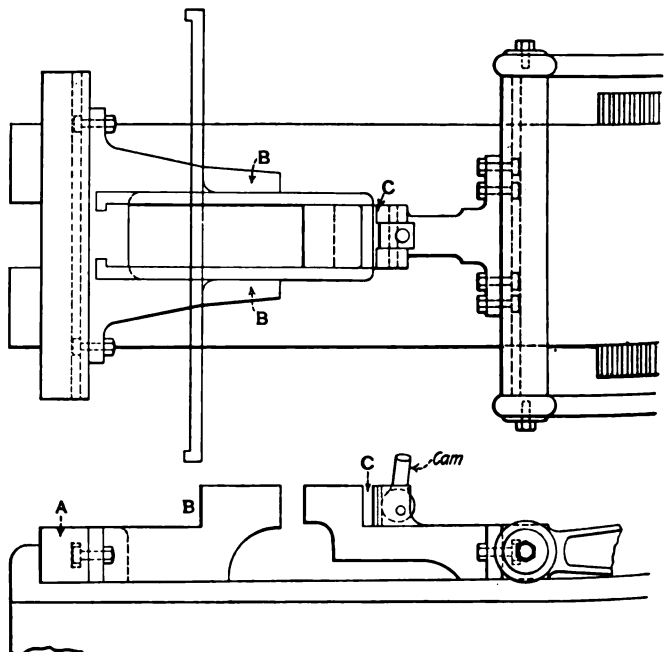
Fixture for making coupler yoke pockets on a bulldozer
